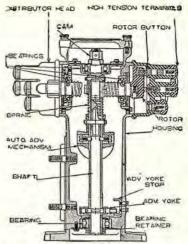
Side sectional view of Delco-Packard ("Twin-Six") distributor.
